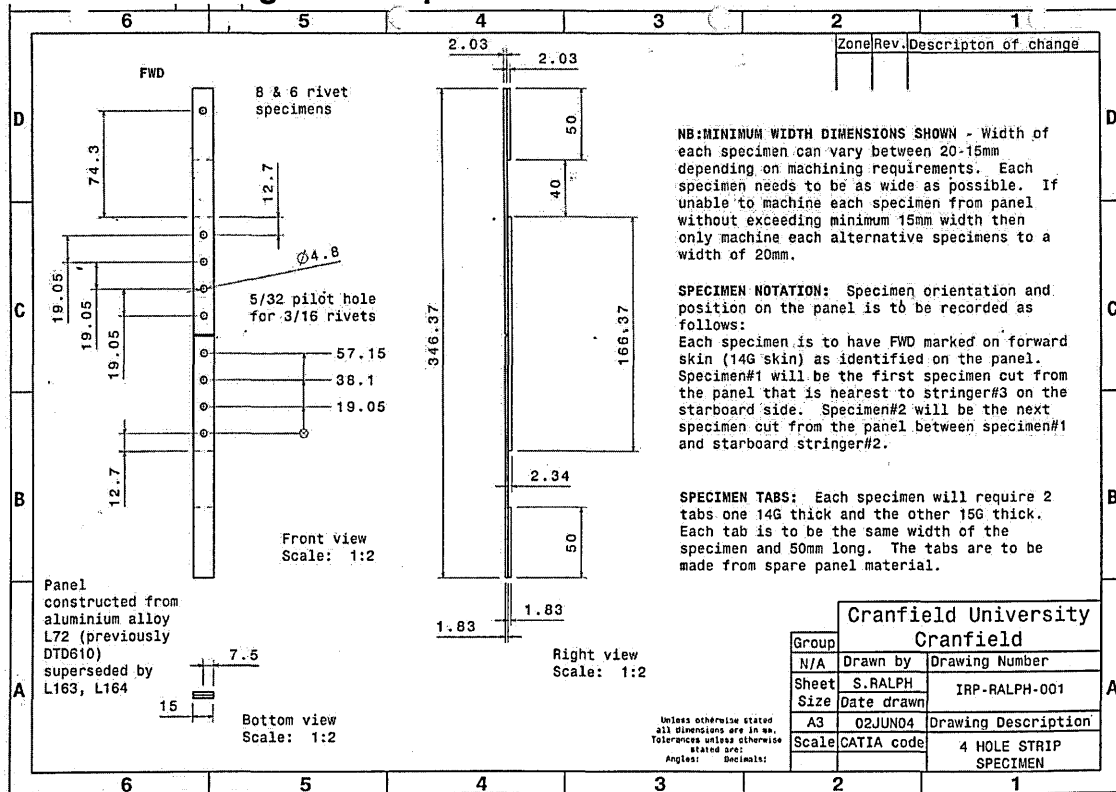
6 & 8 Rivet Specimen Final Dimensions
